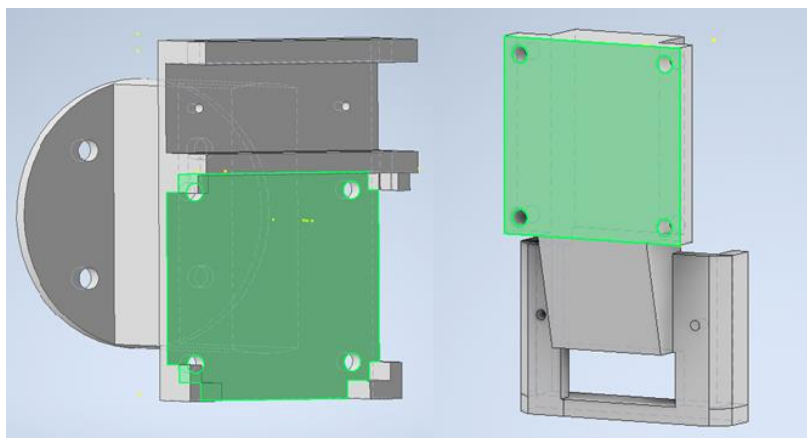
The designed LiDAR frame is able to link or detach easily with handheld frames
